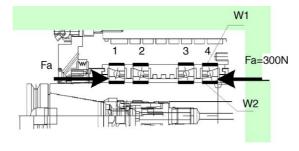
Clearance W1 between bearing and housing and clearance W2 between bearing and spindle.
